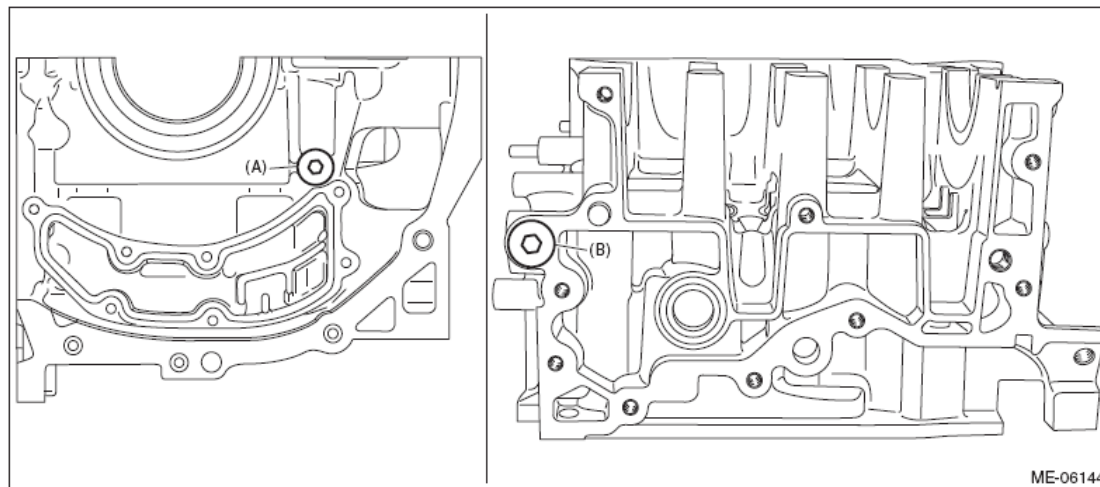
Identifying Cylinder Block And Main Gallery Plug
